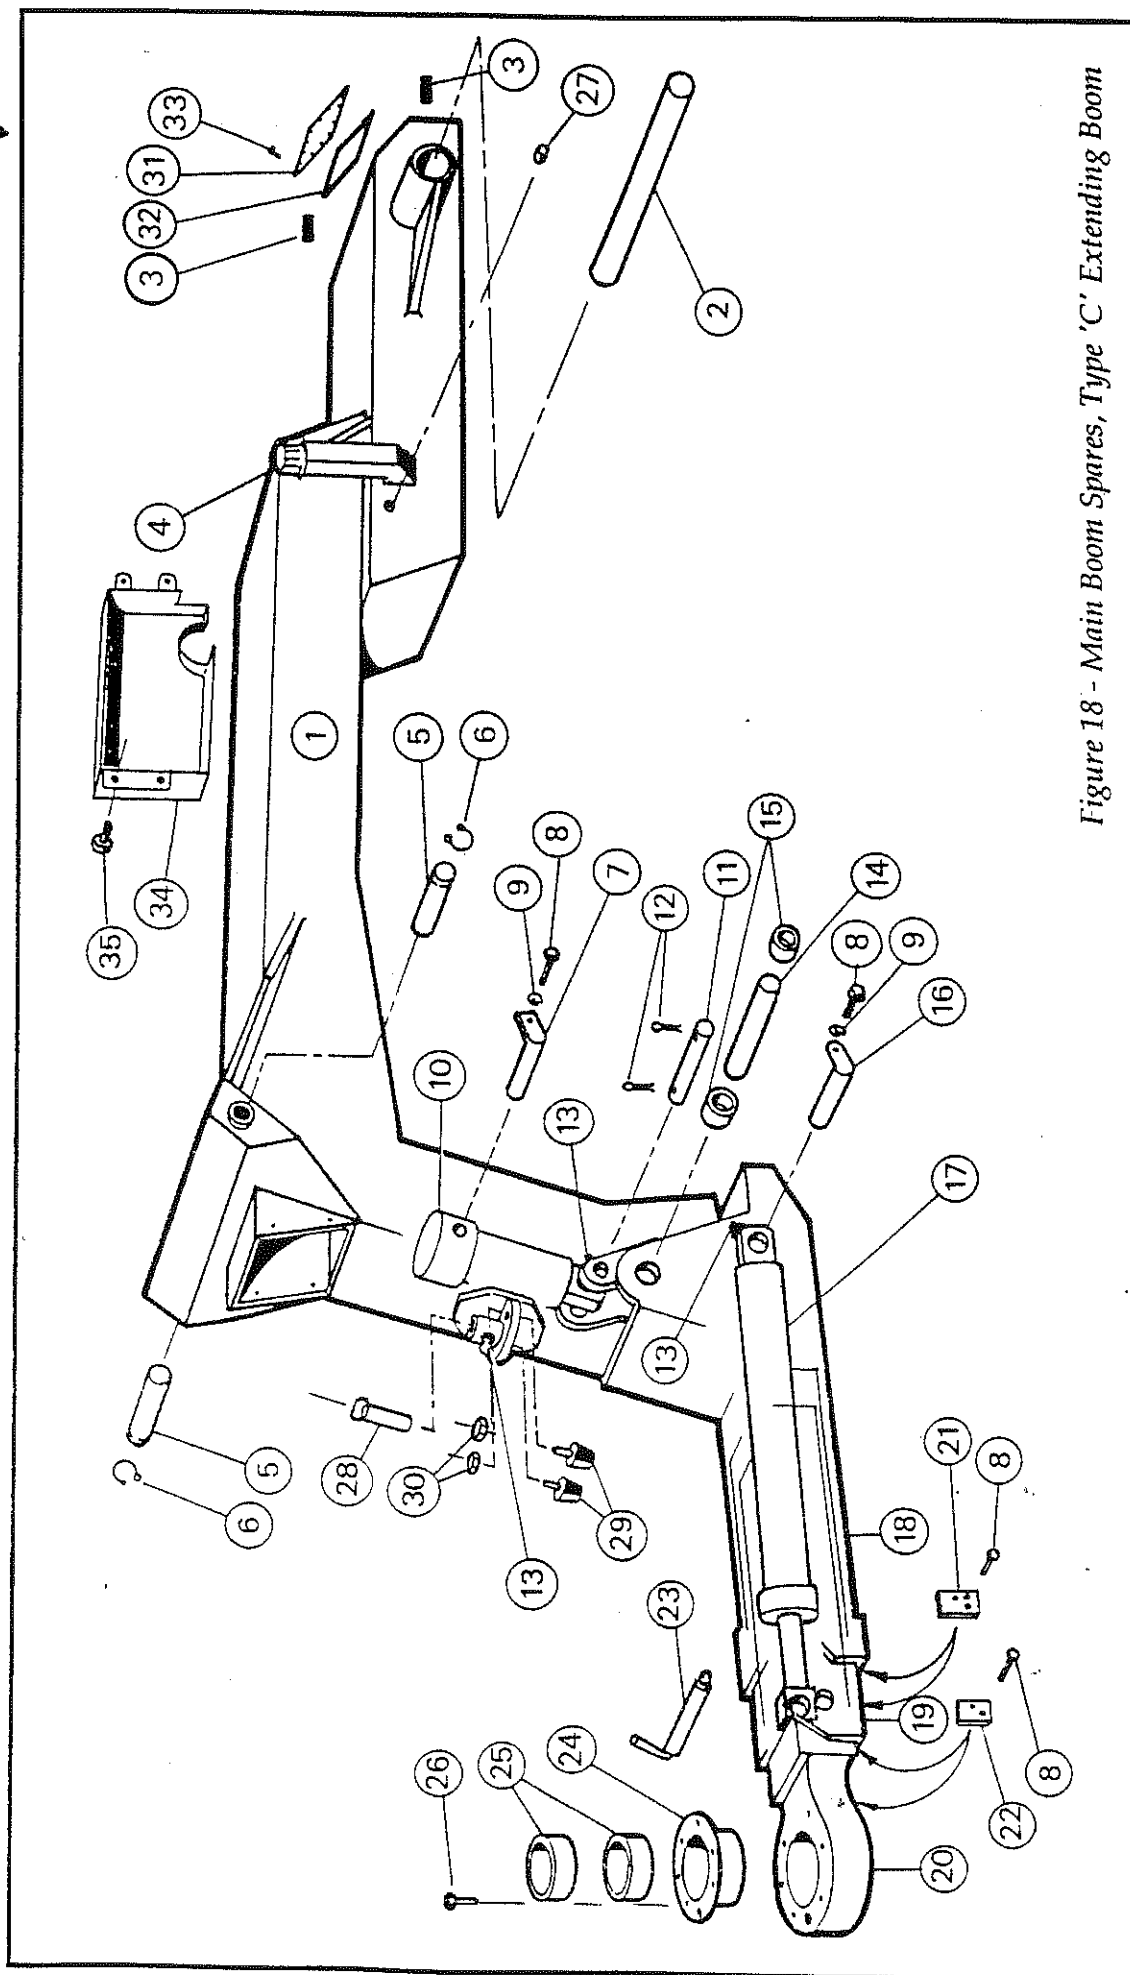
Main Boom Spares, Type 'C' Extending Boom
